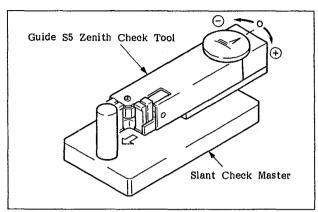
Preparation that Must be Made before Making Adjustment
